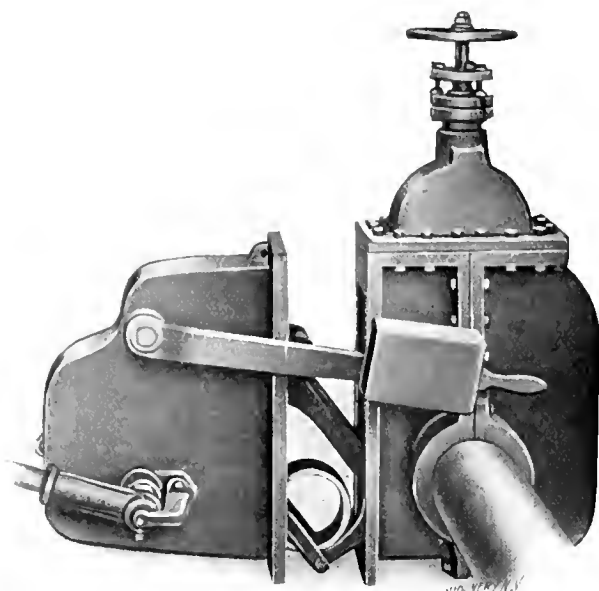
Removing the Sawing Mechanism and the Severed Section of Pipe.
